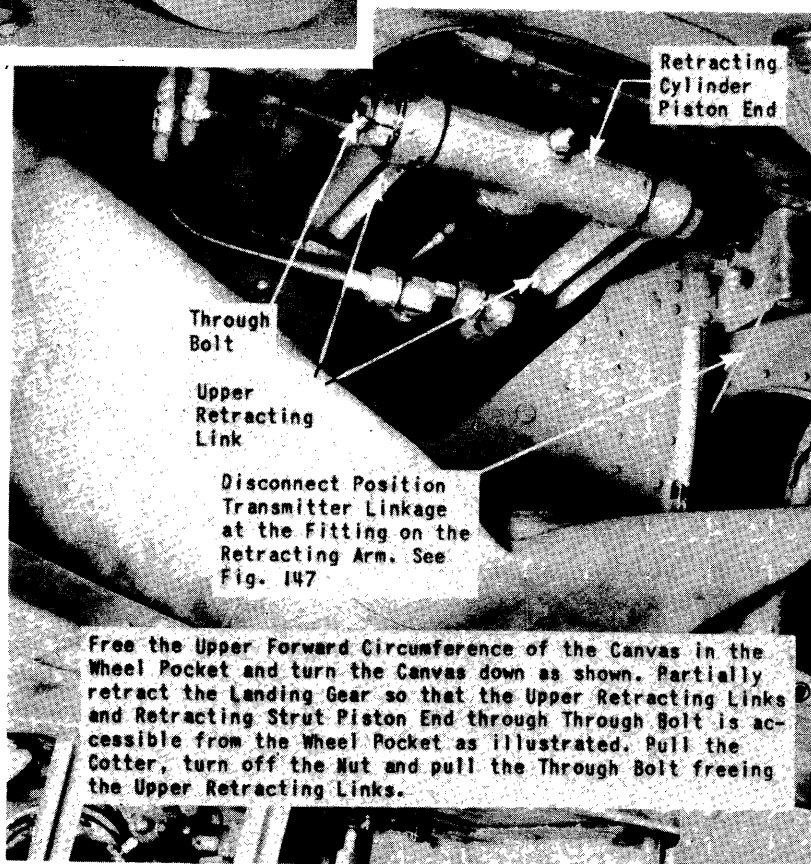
Piston Half Extended for Removal of Piston End Through Bolt
